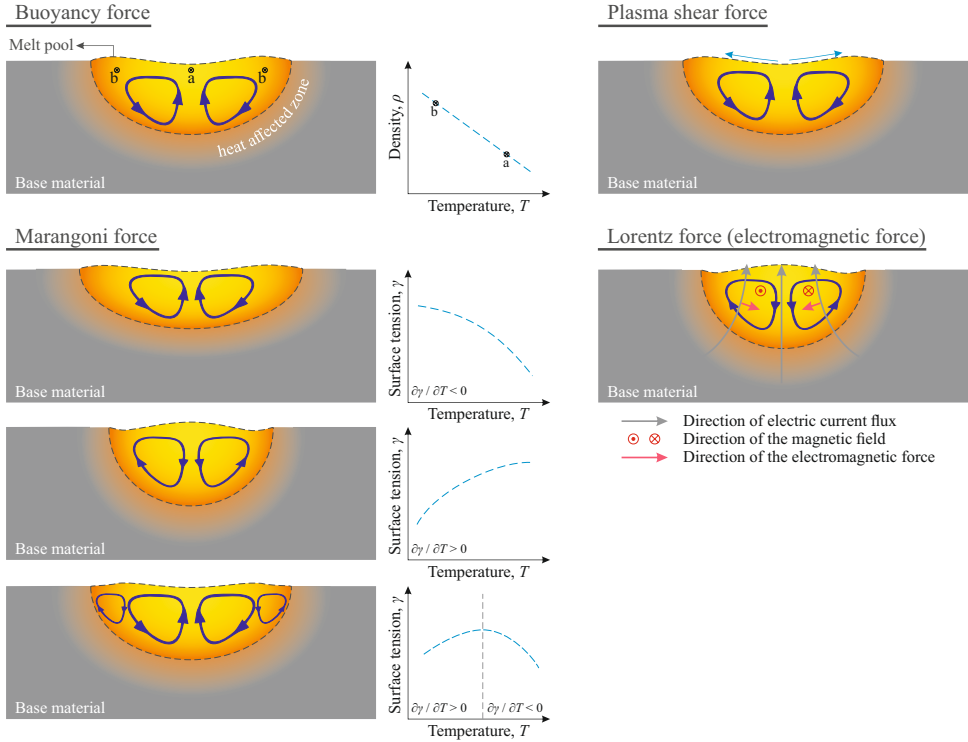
Major forces that drive fluid flow in melt-pools in fusion welding and additive manufacturing [21].
